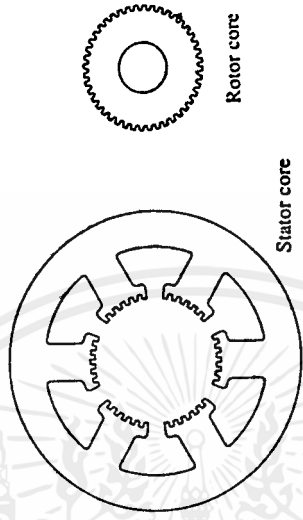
Cross-sectional view of a three-phase VR motor; number of rotor teeth being 44 and step number 132. (After ref. [2].)
